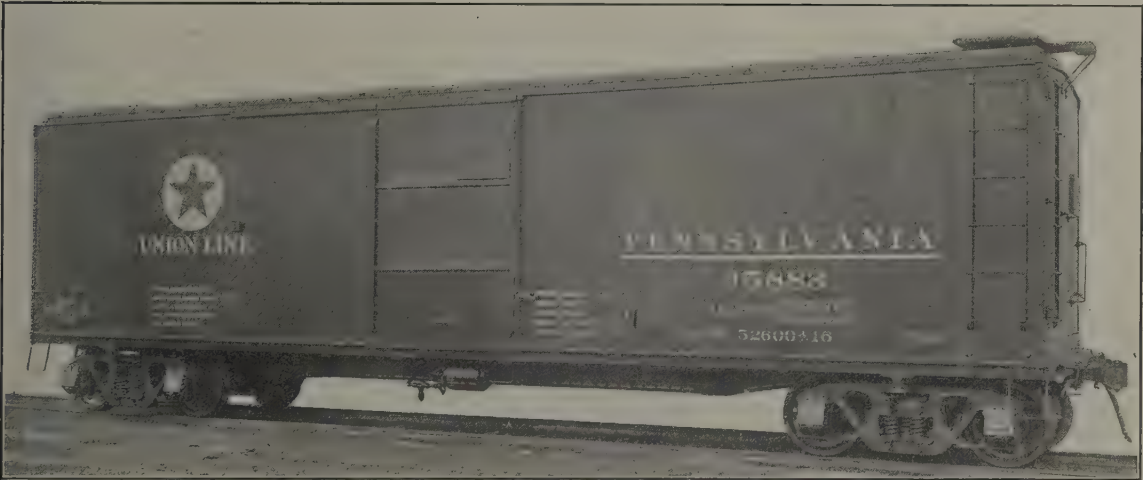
All-Steel 50-Ton Capacity Box Car. Weight 52,590 lb.; Inside Length, 40 ft. 5¼ in.; Inside Width, 8 ft. 10¾ in.; Inside Height, 9 ft. 1 in. Builder, American Car & Foundry Company.
